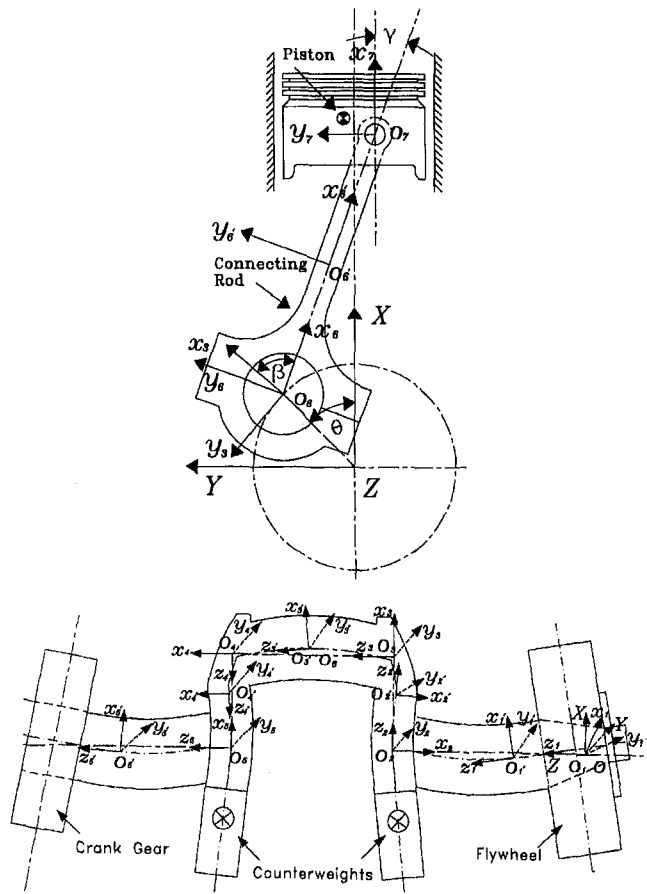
Schematic of the piston assembly/connecting-rod/crankshaft mechanism
